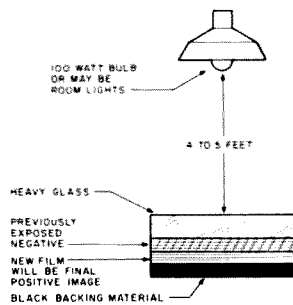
This is the setup for the second exposure. The resulting positive image can be used to make your PCB.
